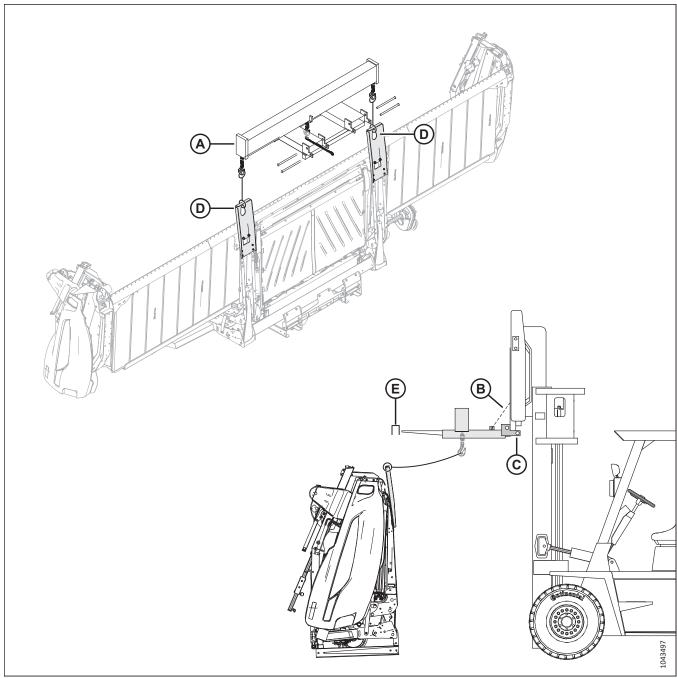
Upright Header, Spreader Bar, and Forklift
